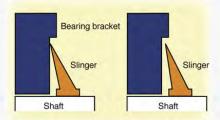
Example of a shaft-slinger seal that combines contact (1) and non-contact seal types
